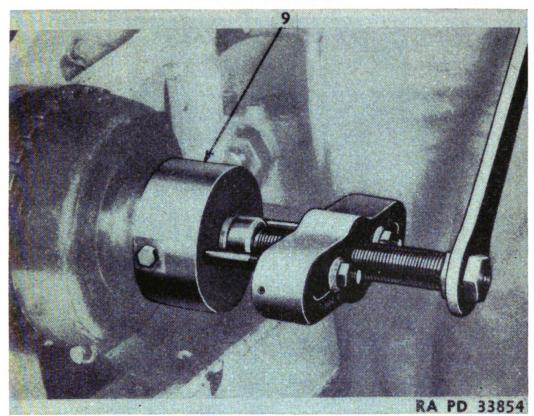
Puller arrangement for sprocket hub bearing holder.
